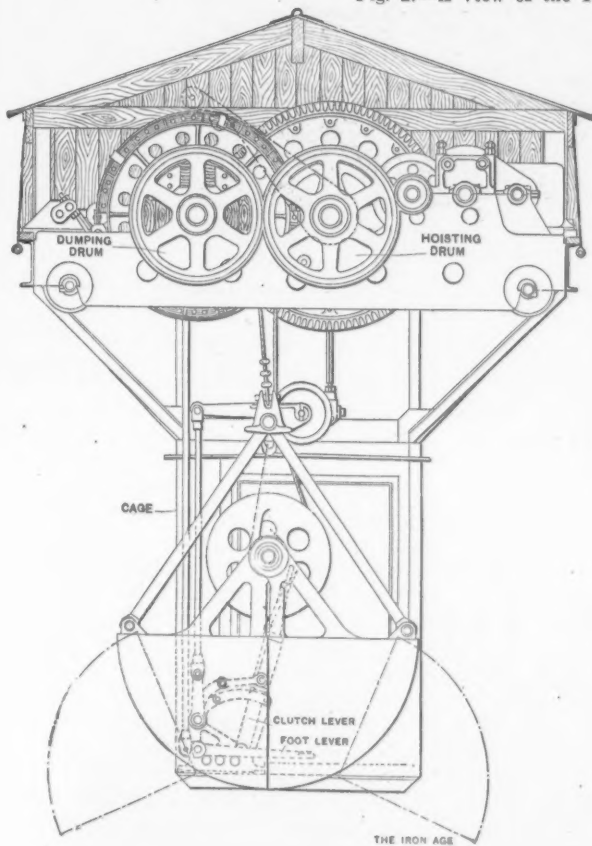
End Elevation, Showing Trolley, Cage and Bucket.
